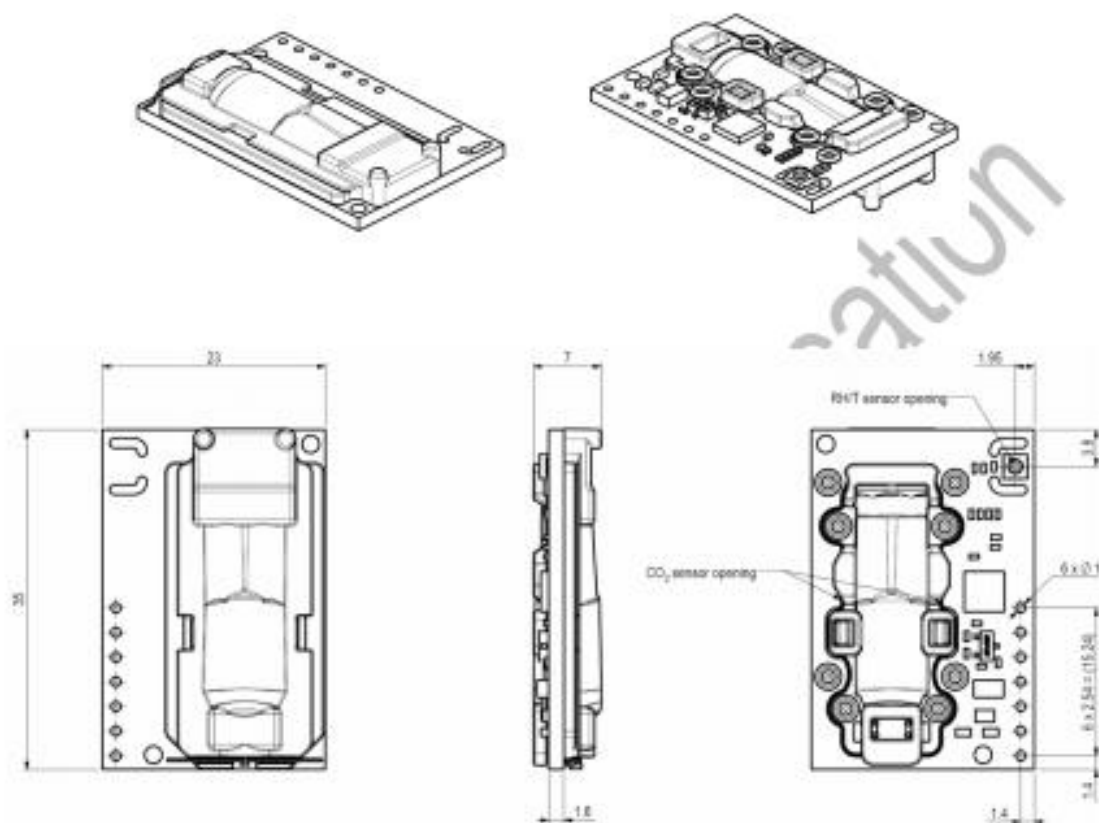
Product outline drawing of SCD30. Pictures on the left show top-view, pictures on the right bottom-view.
